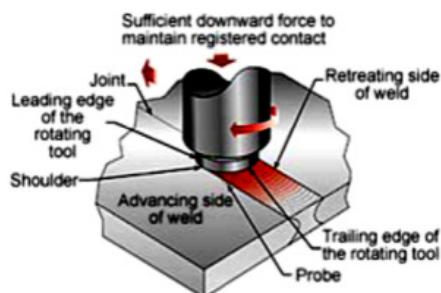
Schematic diagram of the Friction Stir Welding procedure
